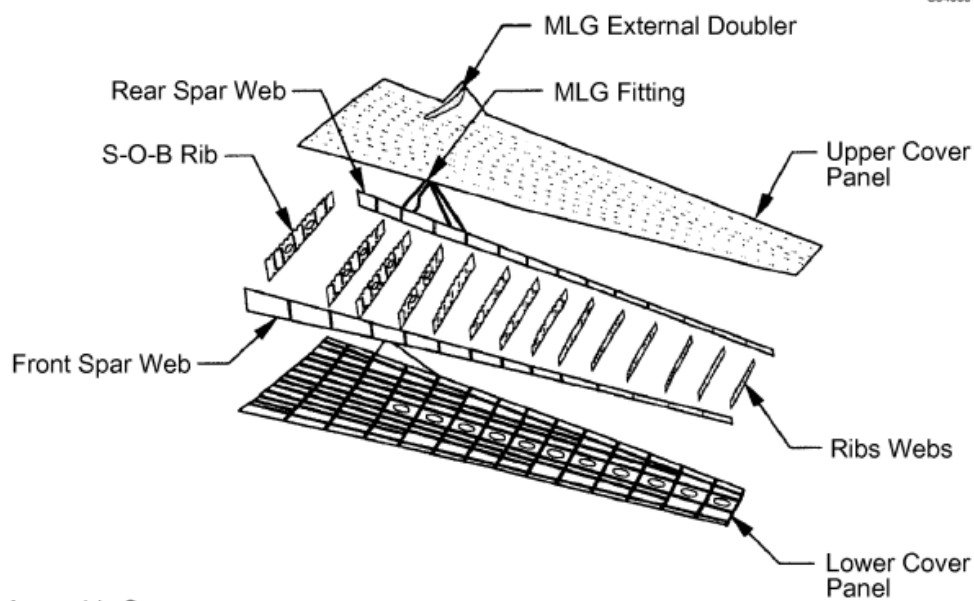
Exploded isometric view of a conventional transport aircraft wing [118]
